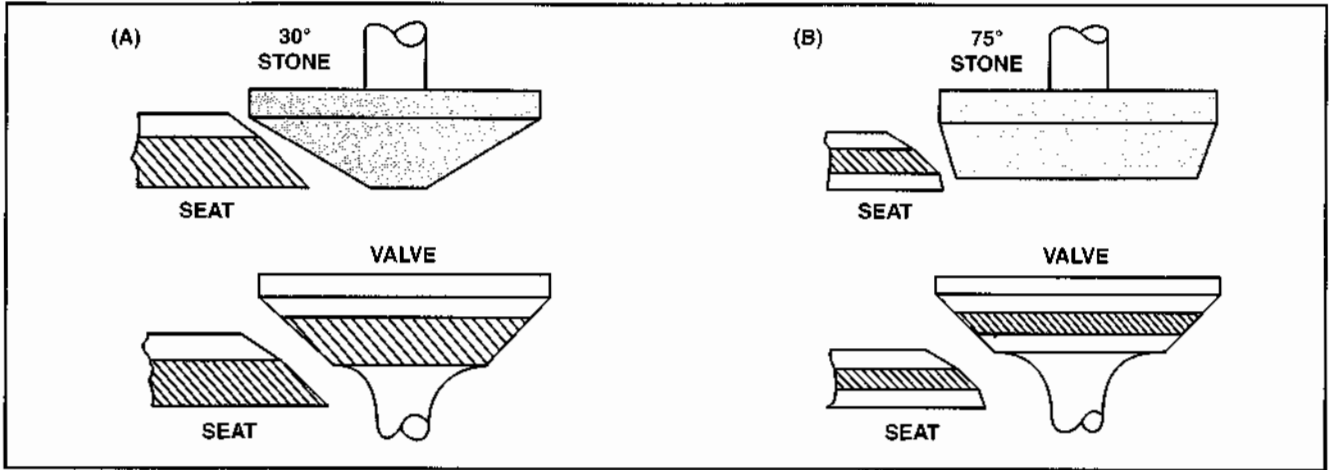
(A) If a valve seat contacts the upper third of the valve face, the seat can be reground to a lesser angle. (B) Contact with the bottom third of the valve face requires regrinding a valve seat's inner corner to a greater angle.
